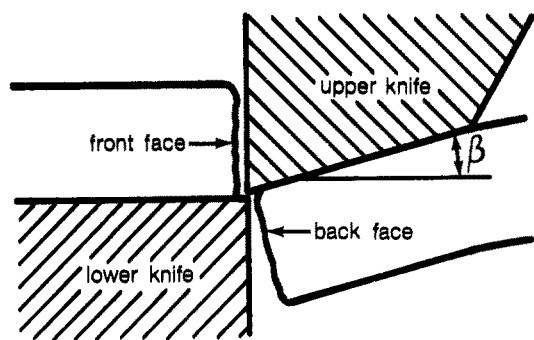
View of a section (between points A and C of Fig. 2, and perpendicular to the lower knife edge), with definitions of front face, back face and upper knife angle (β).
